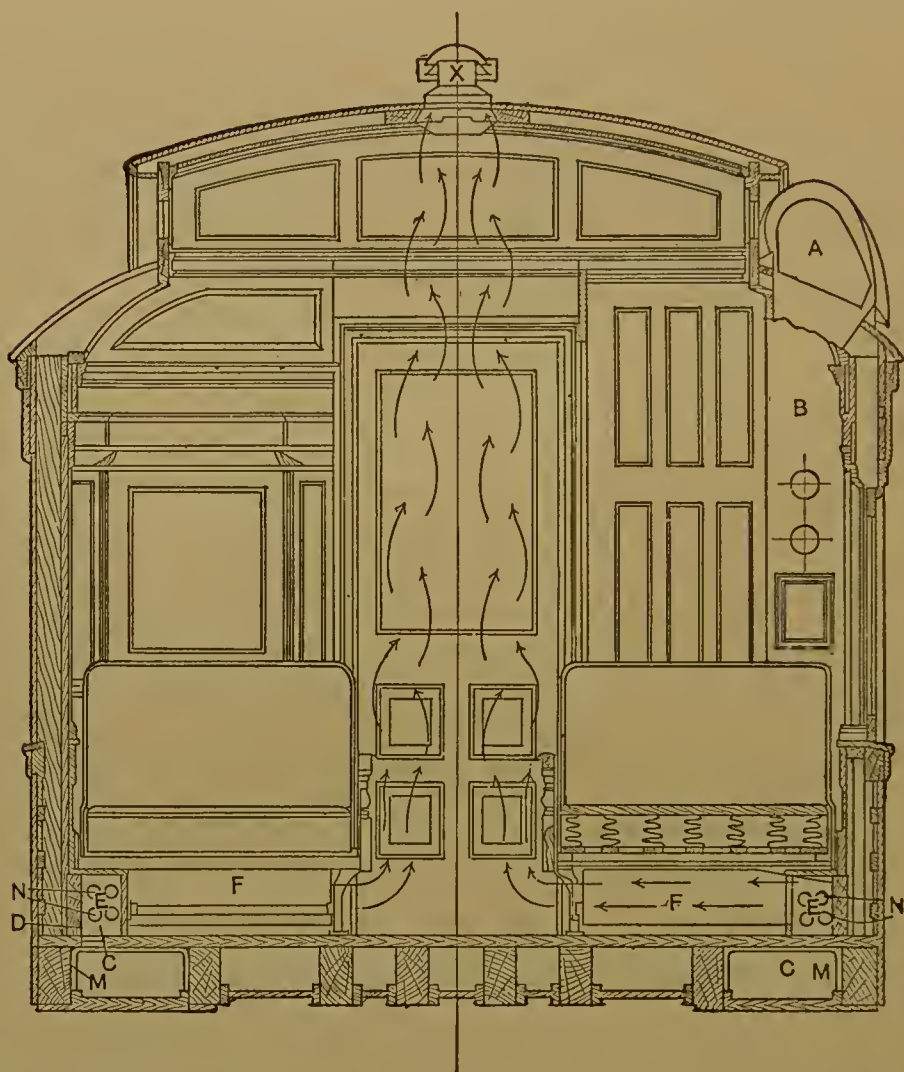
Cross-section of a Car, showing Method of Heating and Ventilation. (From a drawing by Dr. Dudley.)
